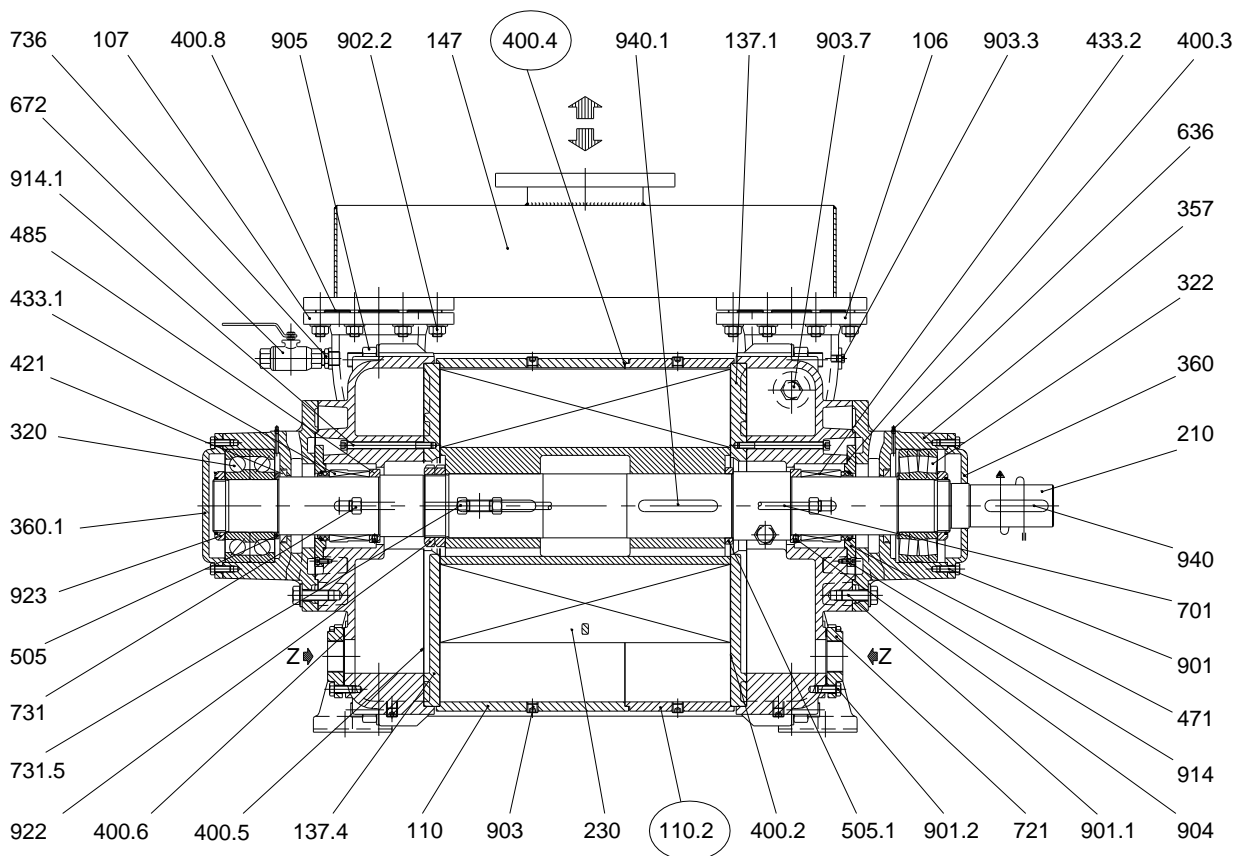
TYPICAL SECTIONAL DRAWING WITH "SINGLE" MECHANICAL SEALS - Series TRSA 200
